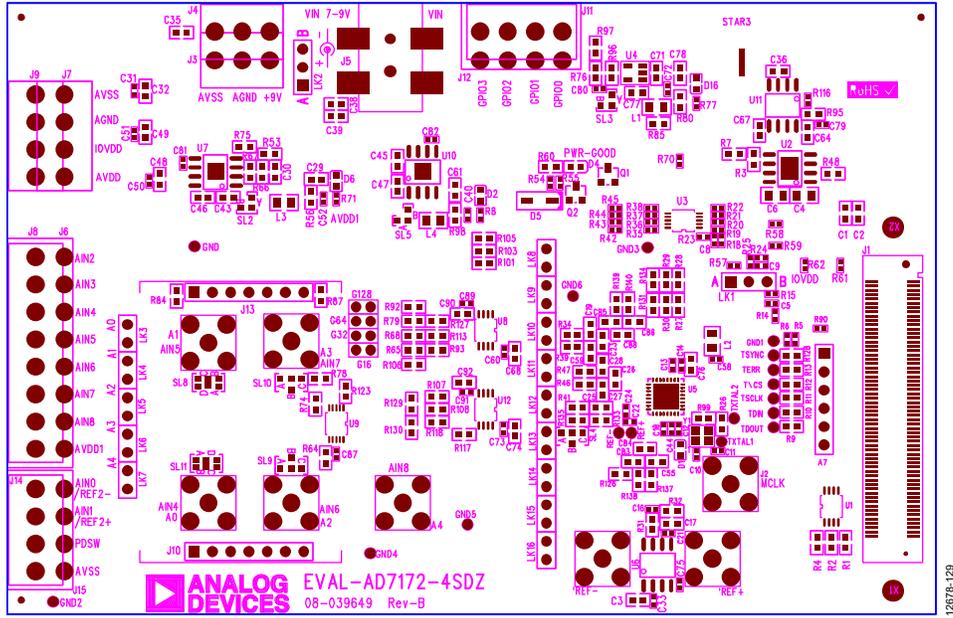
Top Printed Circuit Board (PCB) Silkscreen
